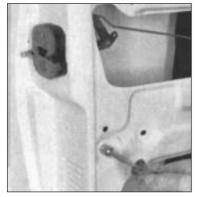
Extracting glass guide channel screw (Sec 12)
